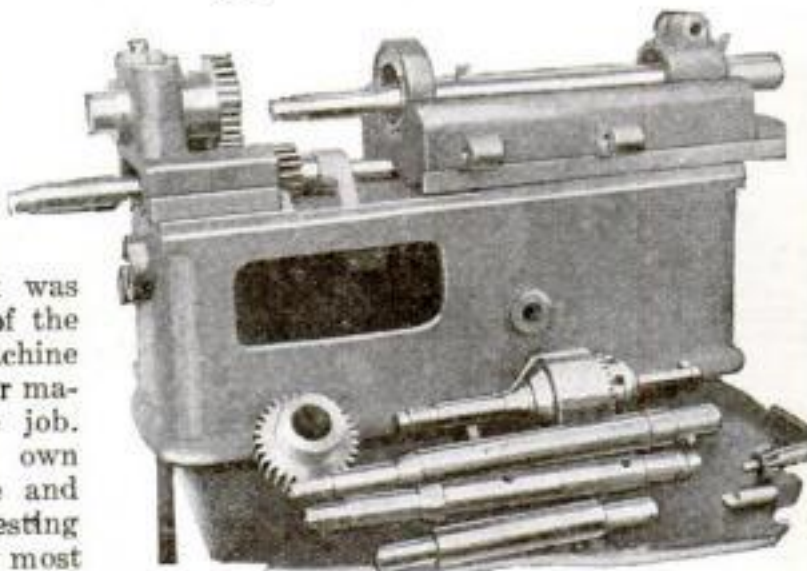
(above)—Every major operation of planing, milling, and boring on this machine was done on a small miller, which ordinarily would not be considered large enough to handle the work. Some of the special tools used also are shown.
